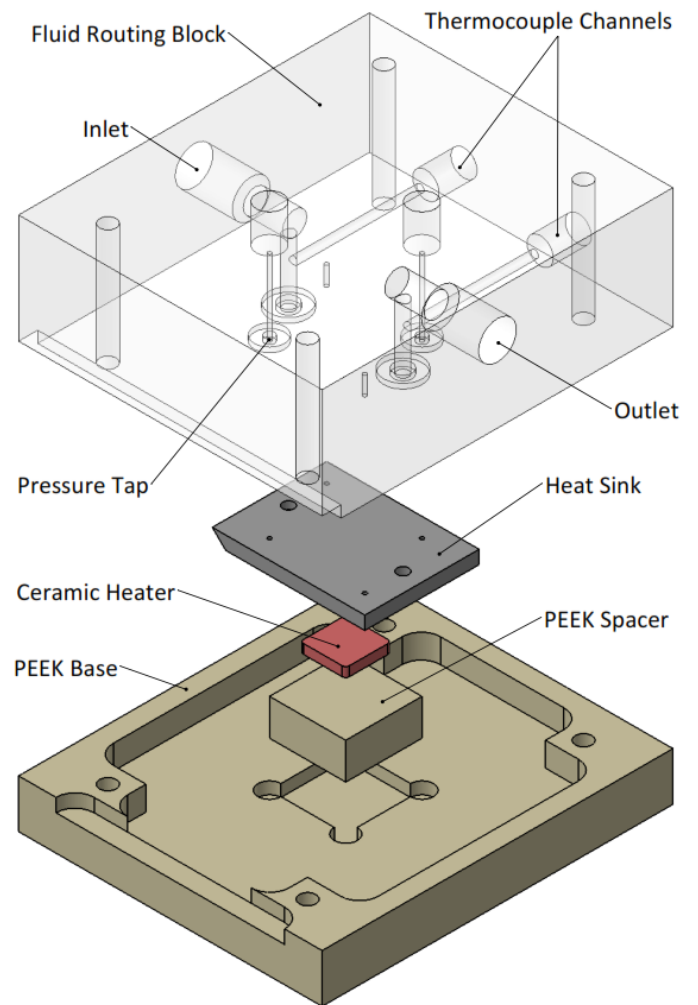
Exploded model of the test section. The fluid fittings, thermal pad, and bolts are not shown.
